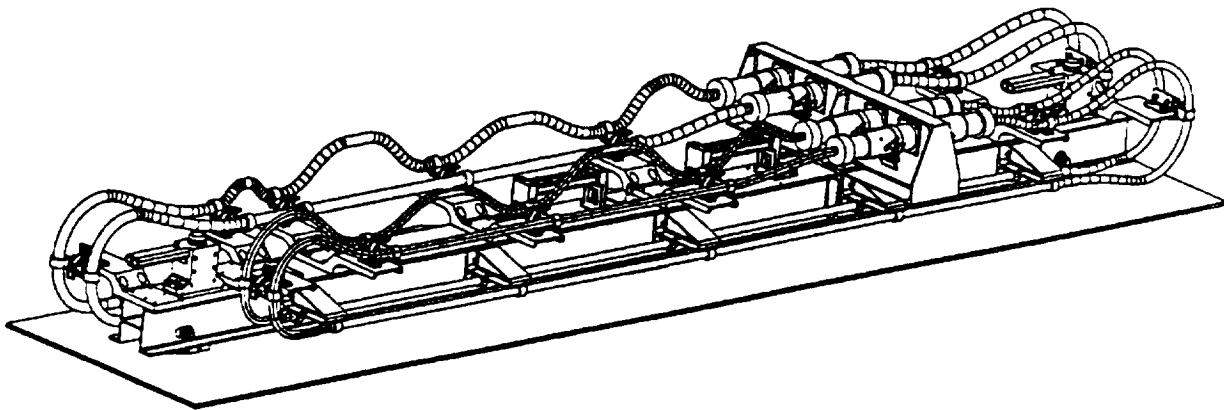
The PDGF Rigid Umbilical Assembly in the Stowed Position
